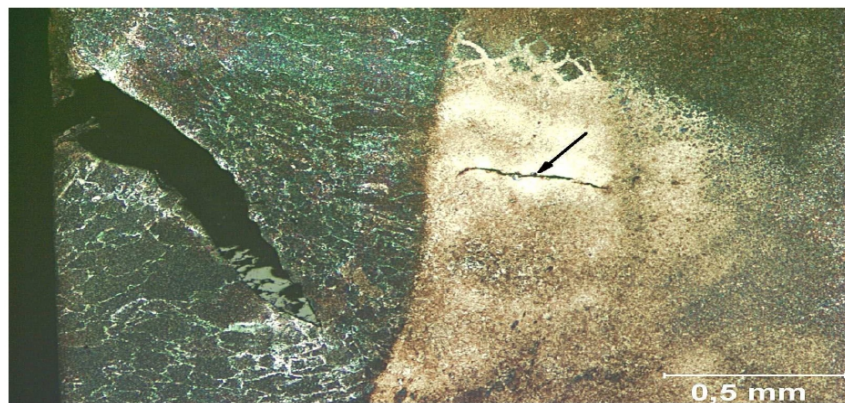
Microstructure of the padding welds. Visible fractures in the HAZ – marked with an arrow, as well as a welding defect – seam filled with slag. Mi1Fe etching and visual (optical microscope) examination
